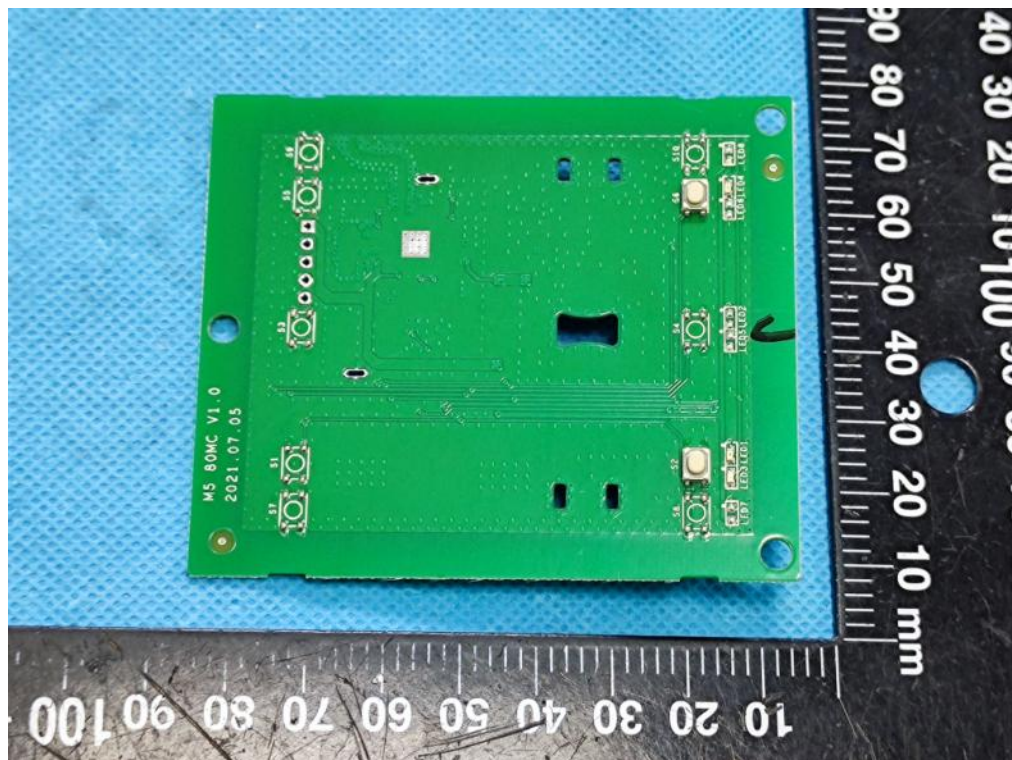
PCB bottom view of control board (Model: M5-2C-80)
